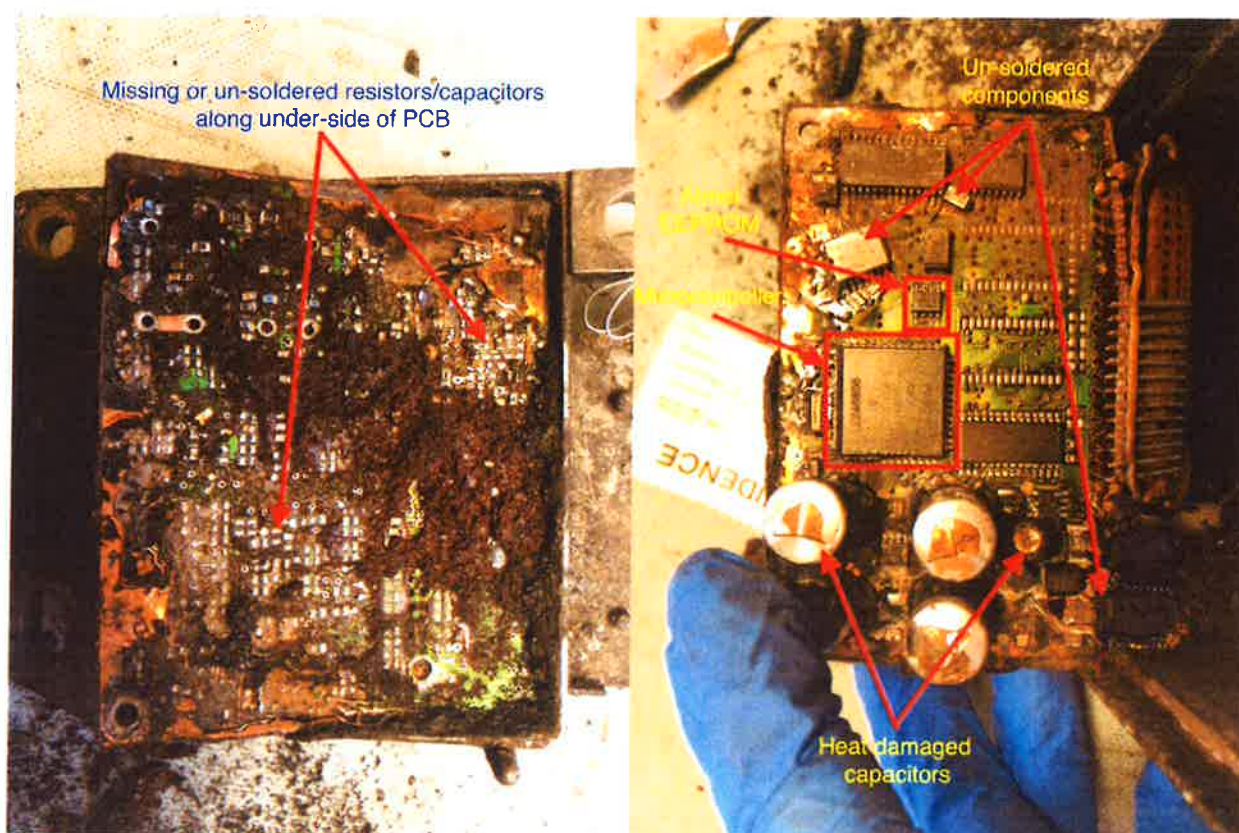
Shows damage to both sides of PCB and components.
